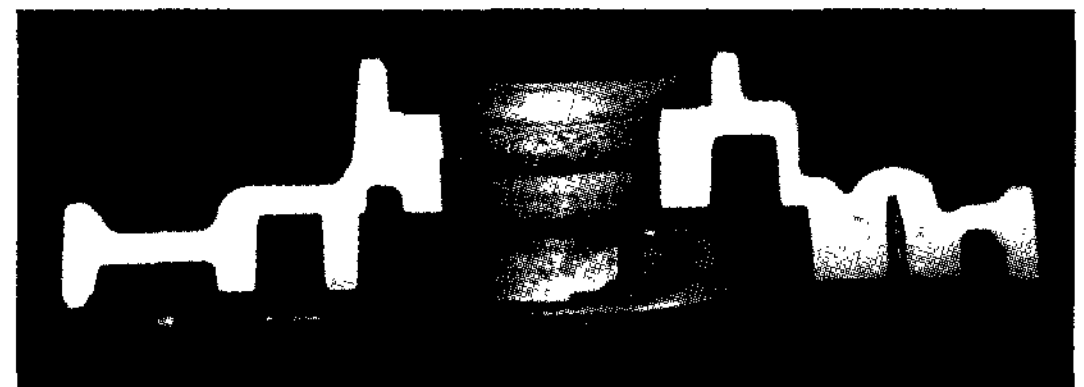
Section of the T6 heat treated Vaccum Diecasting.
